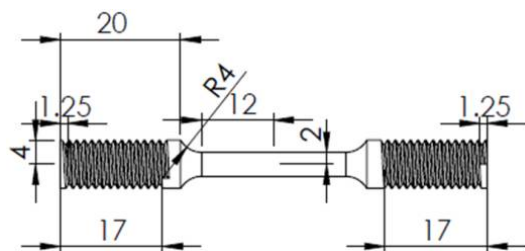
The geometry of the high-temperature tensile test sample with thread
